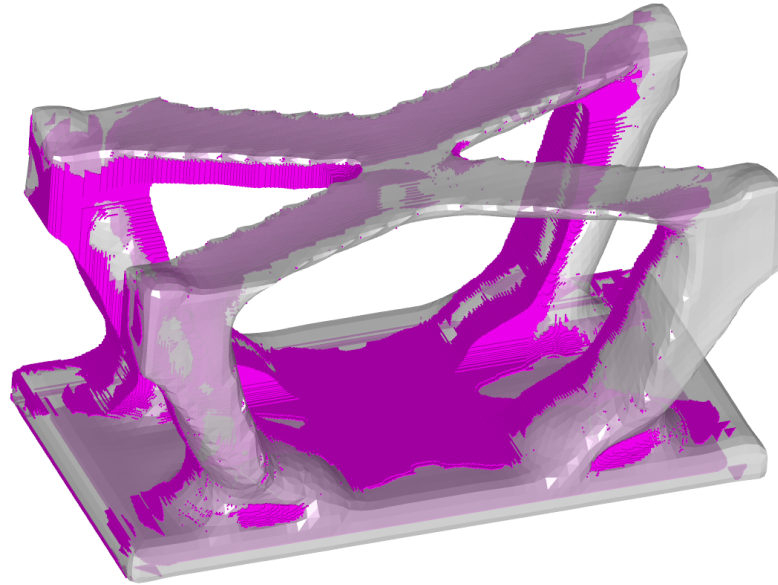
Topology optimized part (light grey, translucent) that cannot be fully machined by traditional methods. Minimum material left after machining with only three setups (9% added volume) shown overlaid (magenta).
